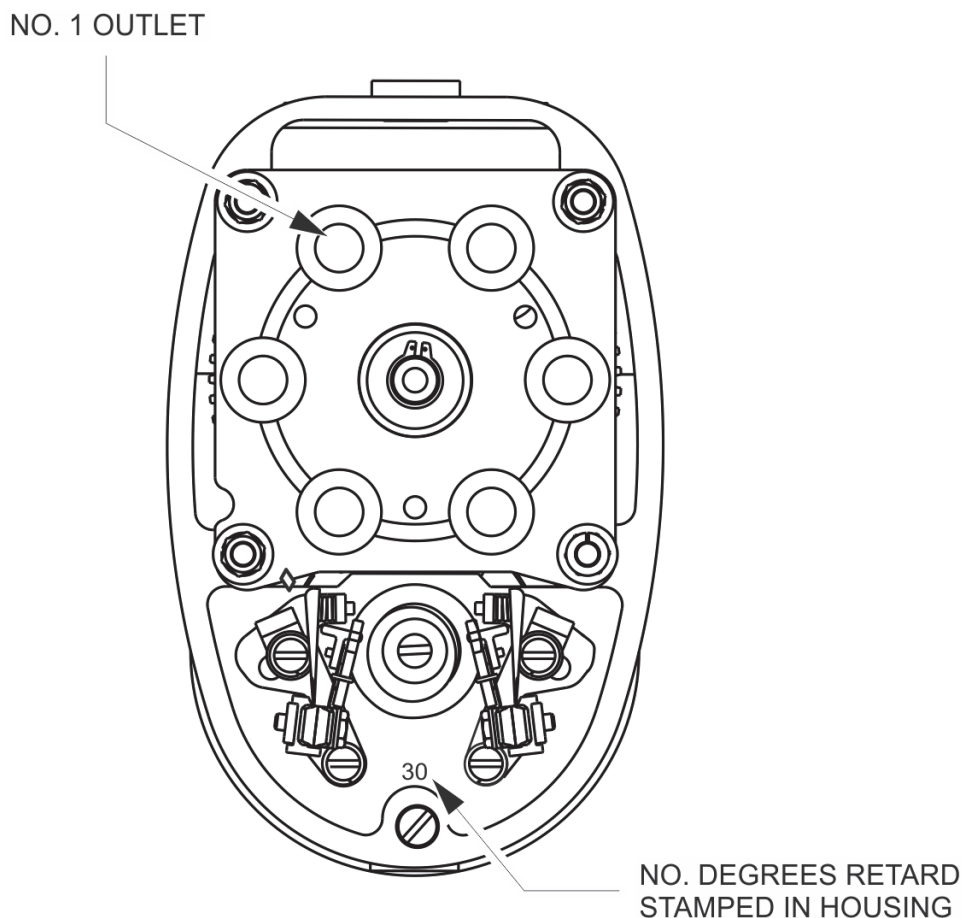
Cam End of Dual Contact Assembly Magneto
